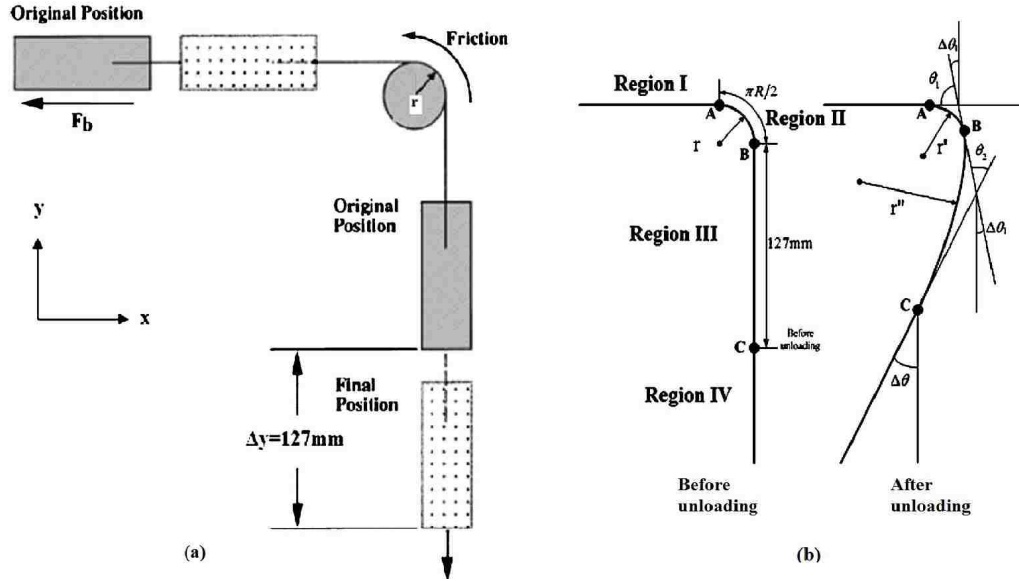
(a) Geometry of the draw bend test with, (b) deformed shape before and after springback, [35]
